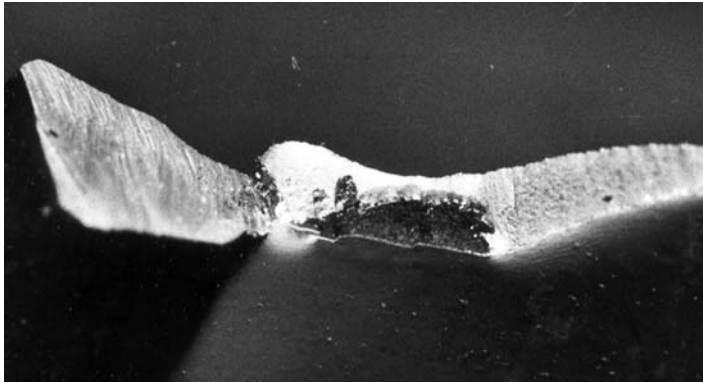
Crack shown in Fig. CH29.3 opened up. The discoloration is similar to that noticed on the fracture surface of the failed blade.
